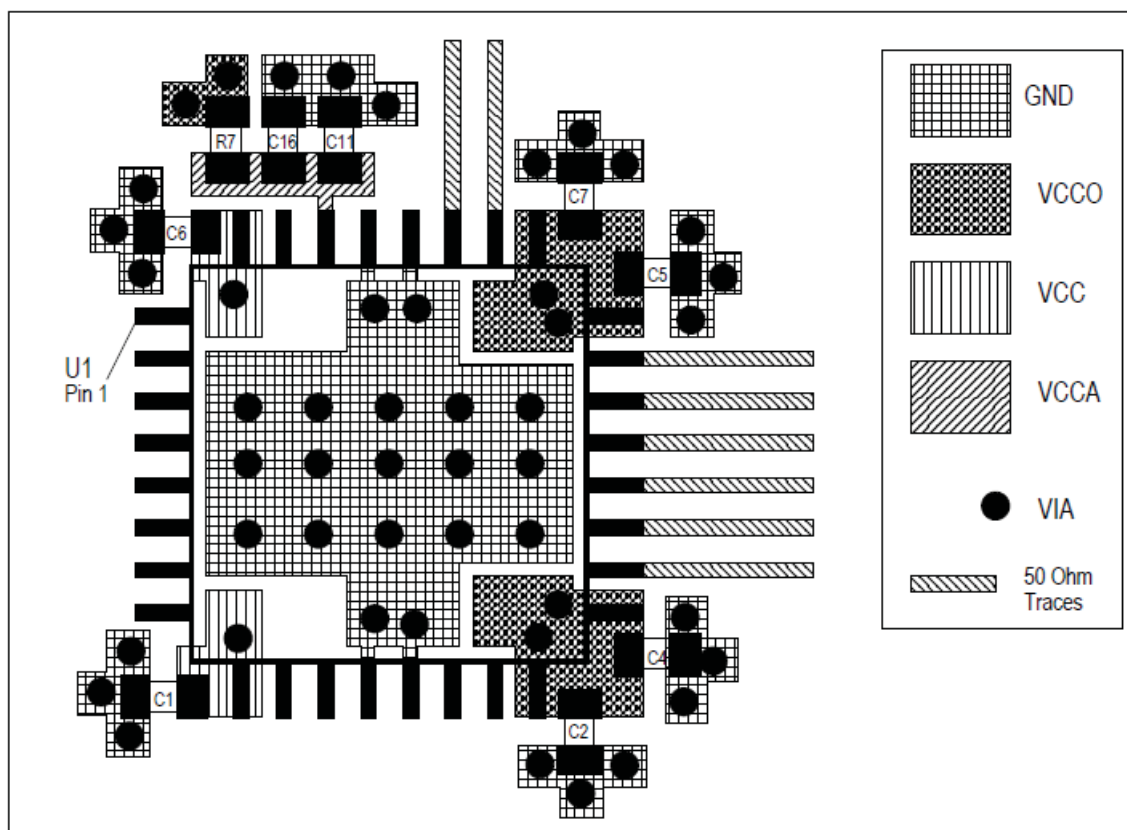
B. PCB BOARD LAYOUT FOR ICS8634-01
